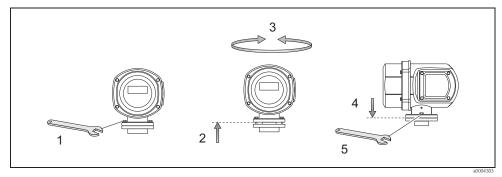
Turning the transmitter housing (stainless-steel field housing)
